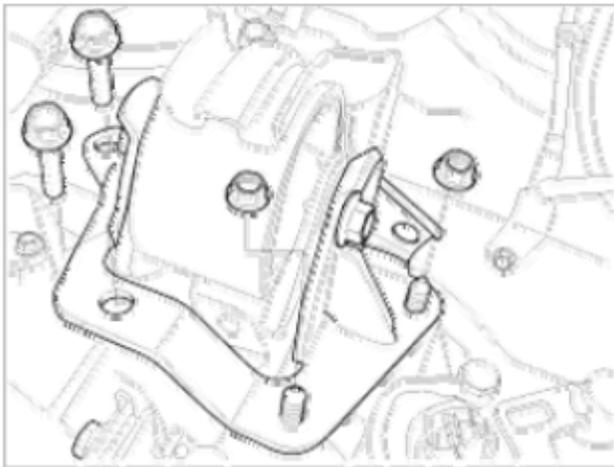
Identifying Transaxle Mounting Bracket, Bolts And Nuts
